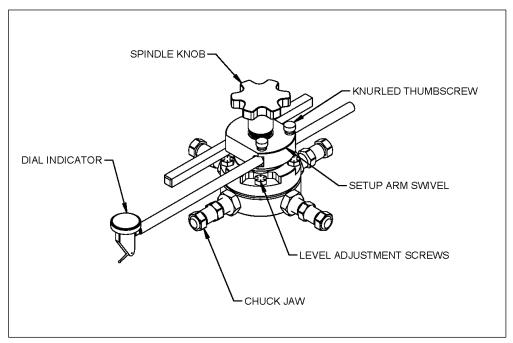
PRECISION LEVEING AND CENTERING THE MACHINE
